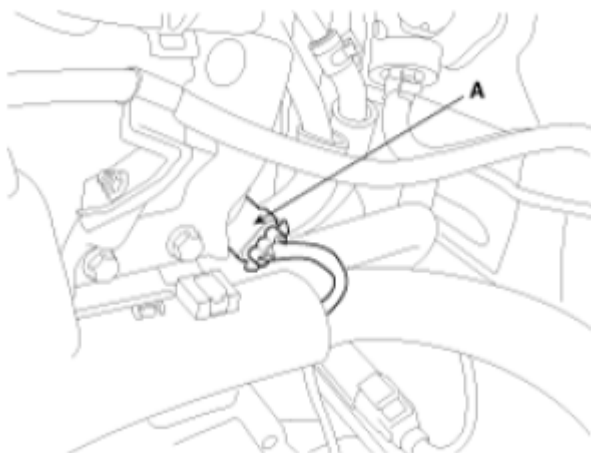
Identifying Bank 1 CMP Sensor Connector
